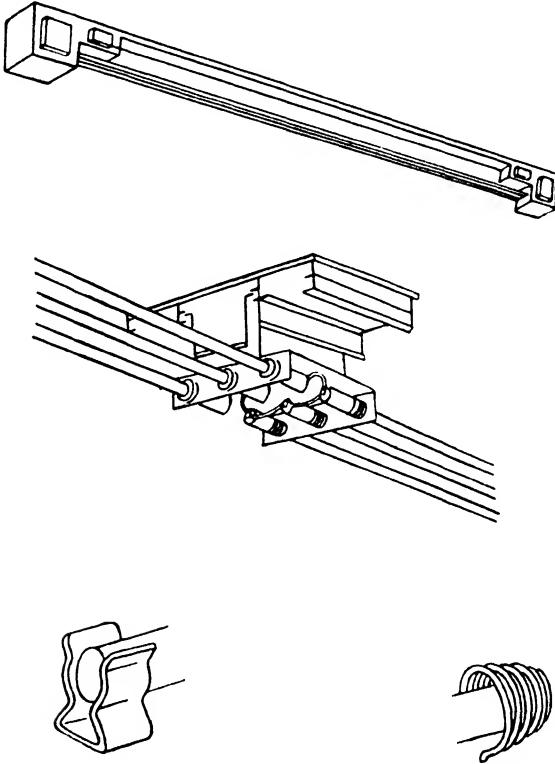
Cold Cathode Lighting Fixtures. (a) Triple-tube Fixture (General Electric Co., Ltd., London), (b) Intermediate Assembly (General Luminescent Corporation, Chicago), (c) Phosphor-bronze Clip Housing, (d) Helical Spring Housing.
